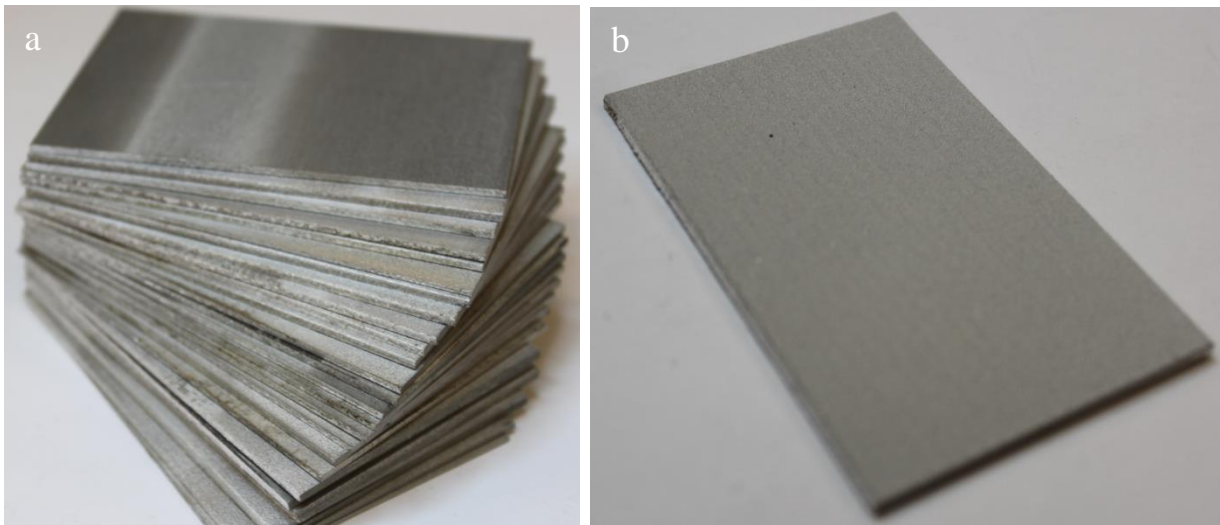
AZ31B (a) bare coupons and (b) an Al cold spray coated coupon for corrosion testing
